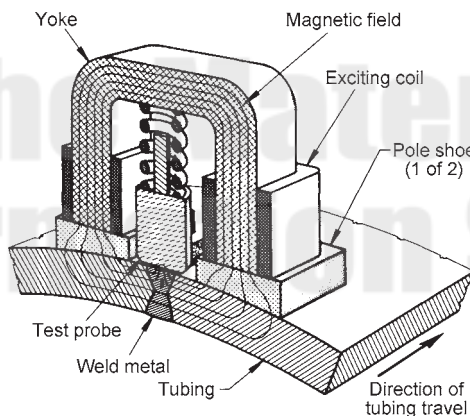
Setup for the flux leakage inspection of welded steel tubing. Source: Ref 1
